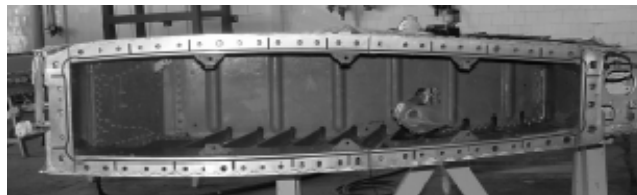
Steel Fail Safe plate, on the wing box to fuselage connection.
